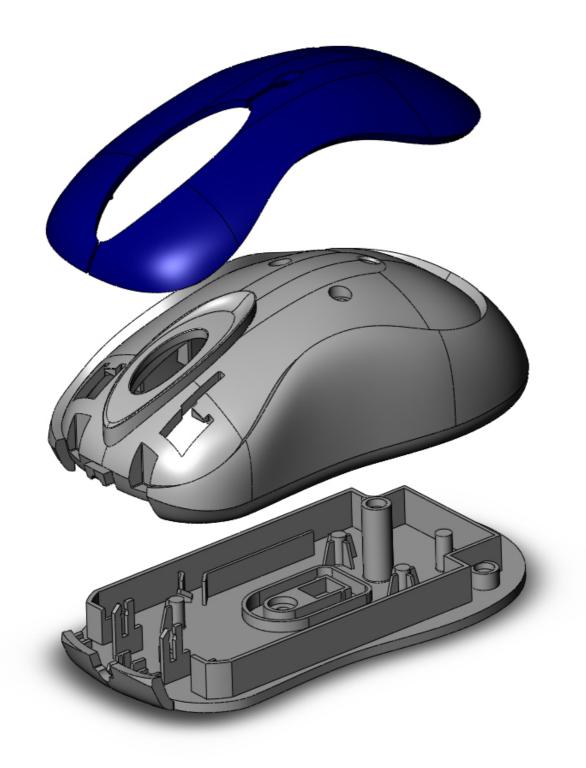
Exploded view of the completed Solidworks CAD model.
